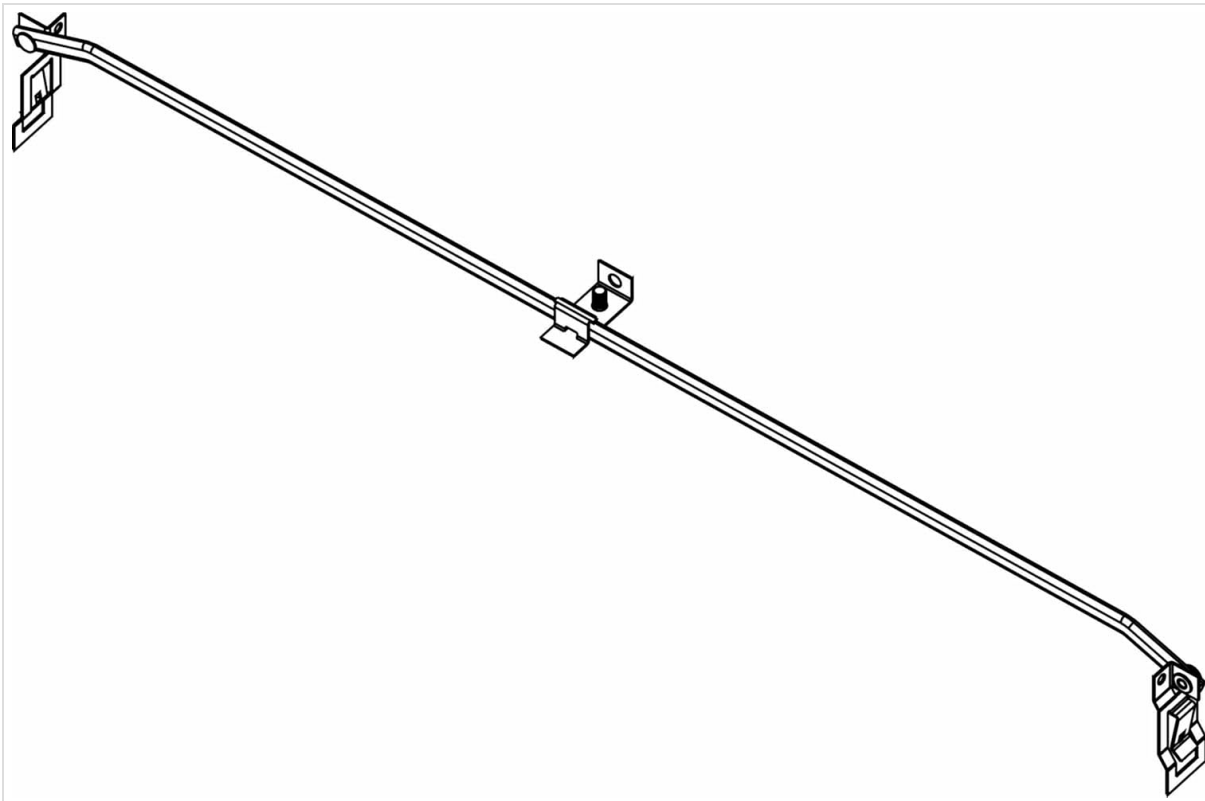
Orbit BHT-1 24-inch T-Bar Bracket. This image displays a line drawing of the Orbit BHT-1 24-inch T-Bar bracket. It shows a long, slender bar with mounting clips at each end and a central mounting point, designed for securing electrical boxes to a T-bar ceiling grid.
